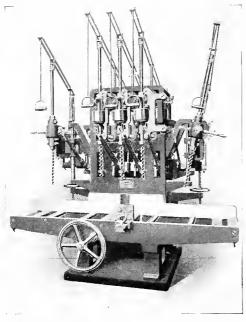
No. 327. Vertical Car Boring Machine with Universal Spindles.
